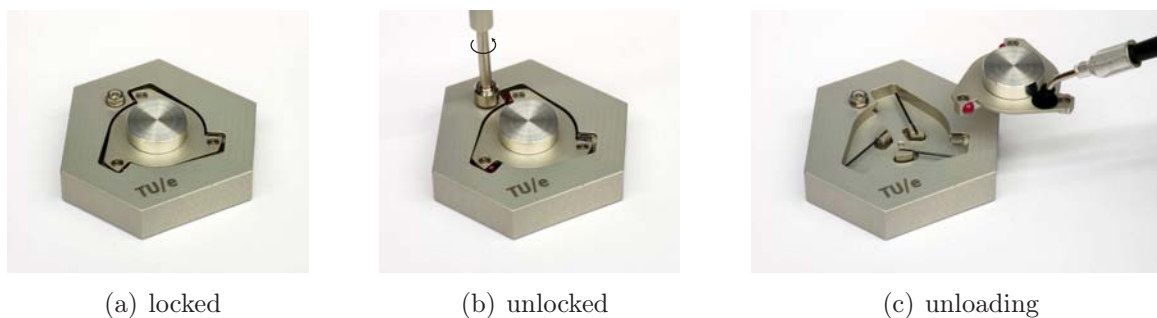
/ Unloading the sample holder with a bellow-type vacuum gripper (Pen-VAC®). The sample holder is loaded with a dummy mass ($\varnothing 15 \times 4.5$ mm) equivalent to the maximum sample and spacer mass.
